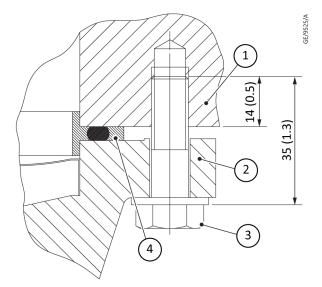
Mounting high vacuum ISO-F flange connection with blind hole thread
